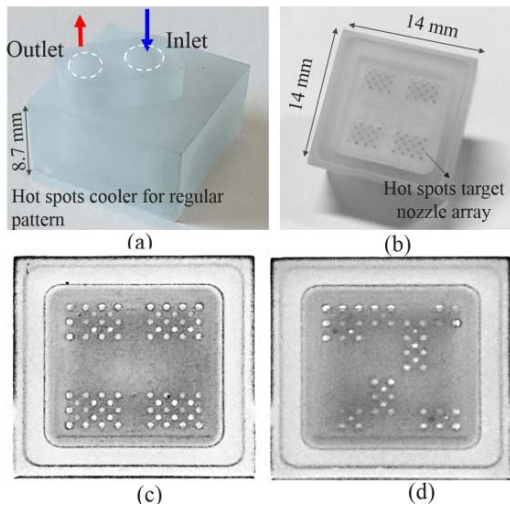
Fabricated demonstrators for the hotspot targeted cooler: a) top view and (b) bottom view of the printed cooler; c) and d) with bottom view of fabricated nozzle patterns.
